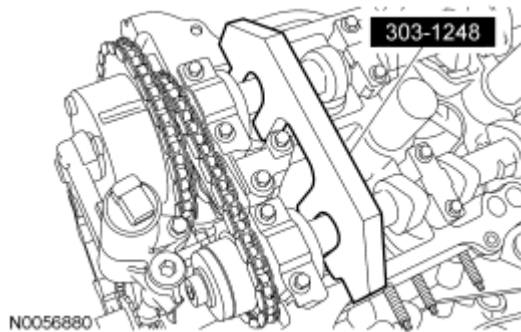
Installing Special Tool (303-1248) Onto Flats Of LH Camshafts
